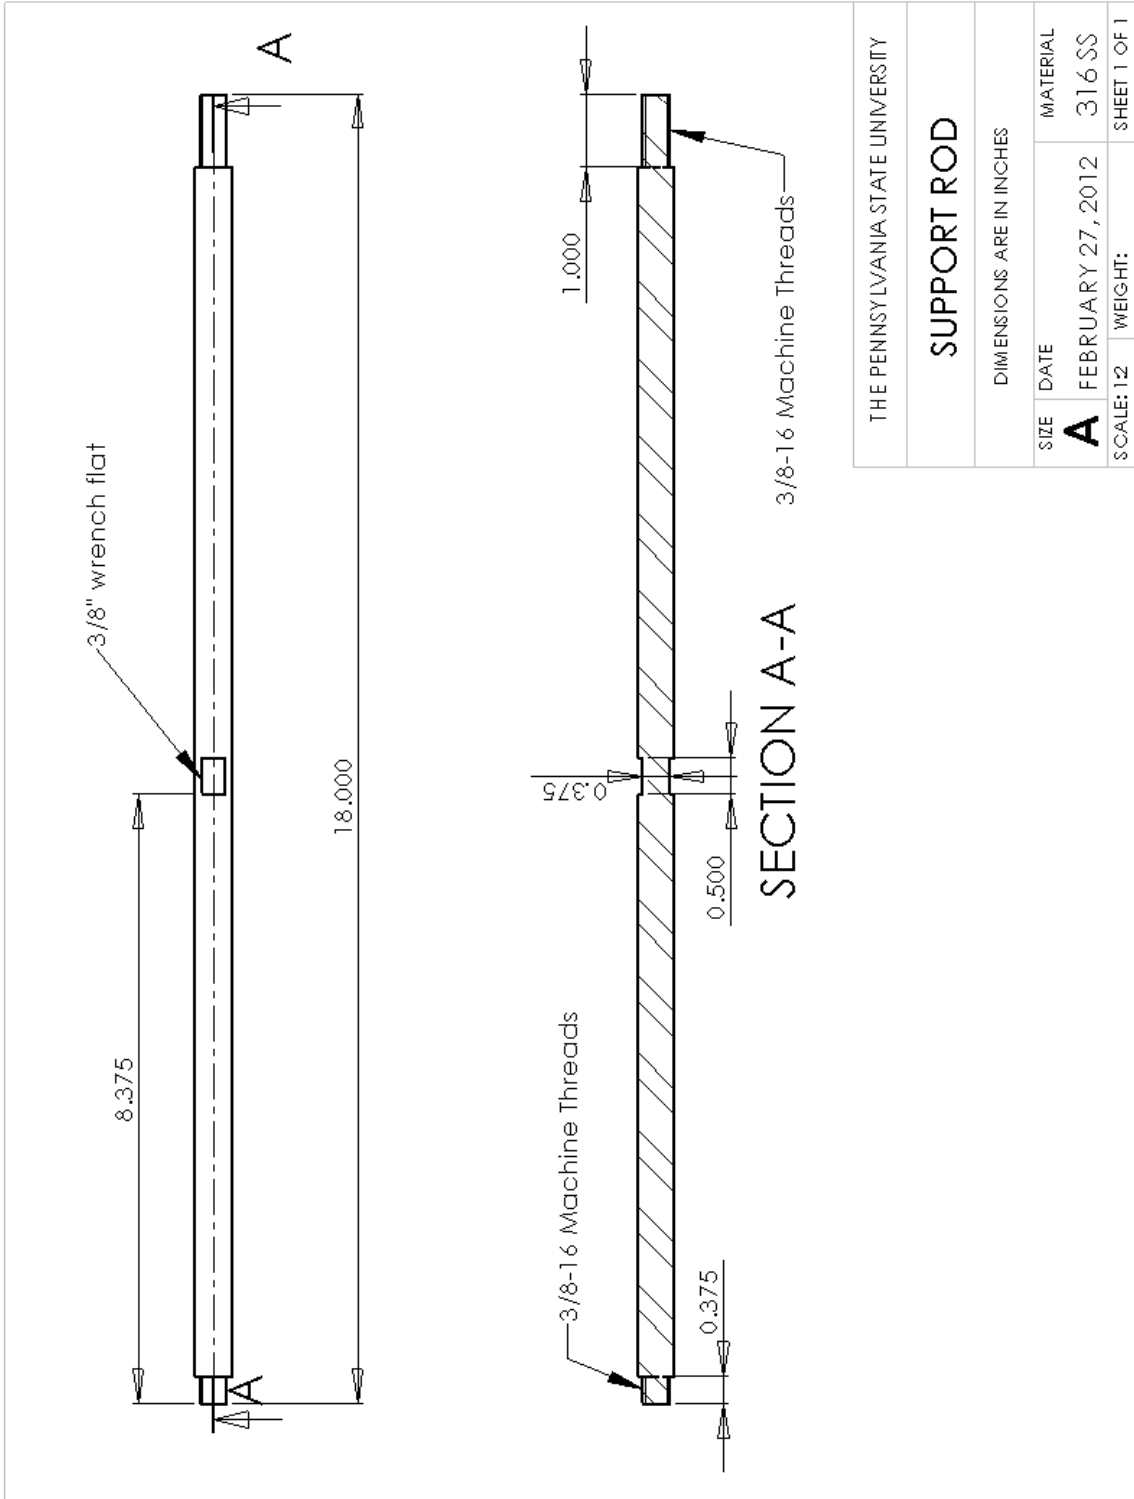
Drawing of one of four support rods that hold counterflow pellet holder inside pressure vessel.
